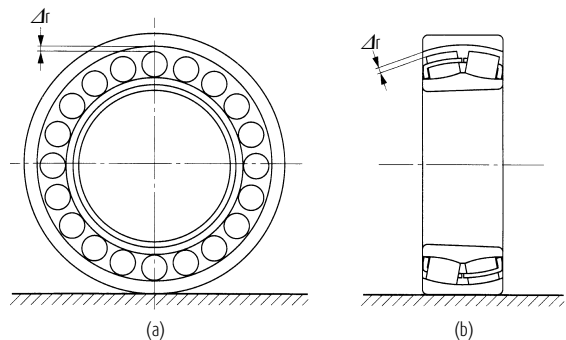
Clearance Measurement Point (Bearing Outside Diameter: Less Than 200 mm)
